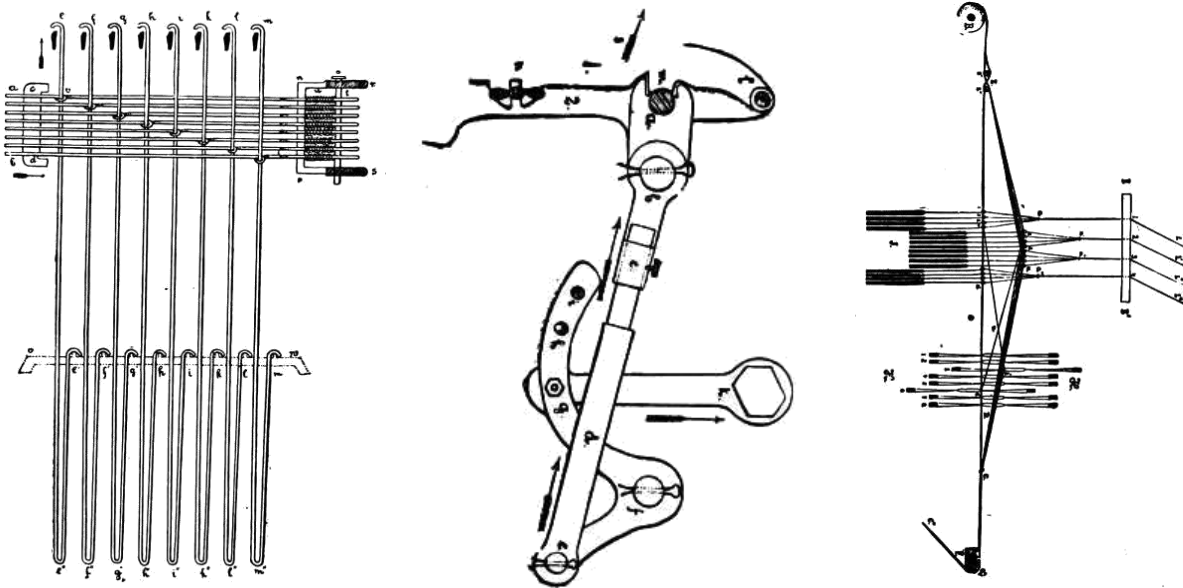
Technical drawings for the Jacquard attachment (images from [70]).
